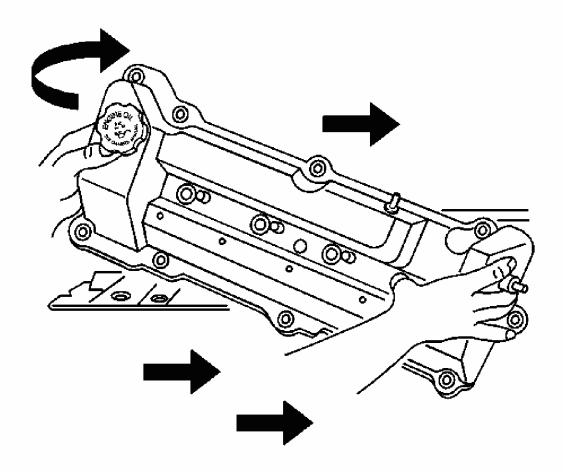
Moving Left Camshaft Cover Rearward Courtesy of GENERAL MOTORS CORP.
